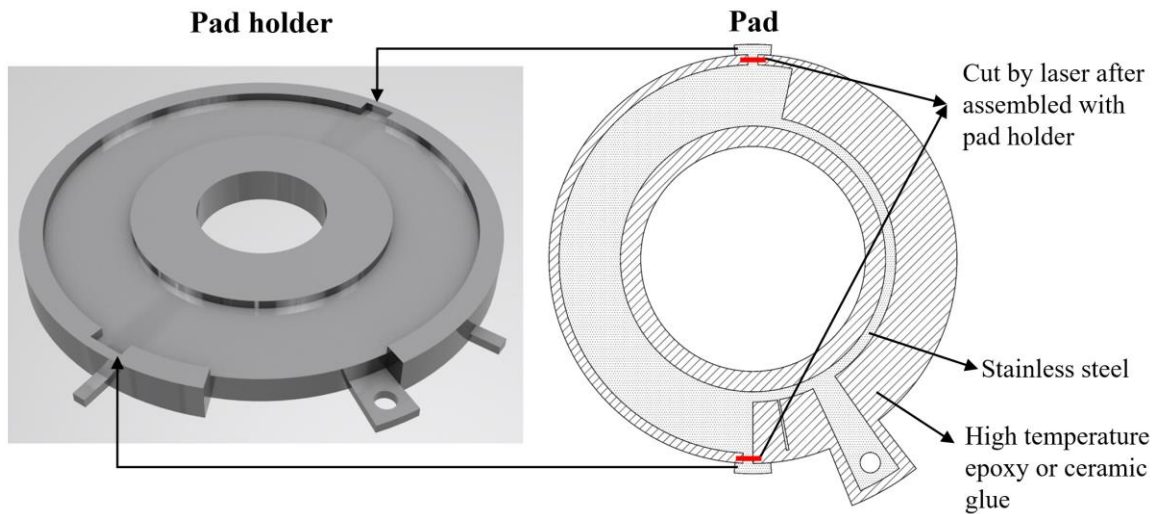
The pad and pad holder in Design II. The pad is composed of stainless steel and high-temperature epoxy or ceramic glue. A mold is required to shape the epoxy. The two protrusions on the top and bottom will be welded with the pad holder. Laser machining is then used to cut the connections (two red lines). The encoding region is on the pad, and the ground region is on the pad holder.
